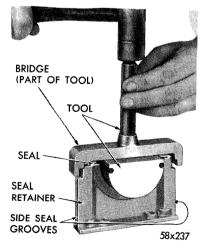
Installing Rear Main Bearing Lower Oil Seal
